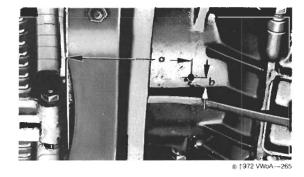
Lubrication access. Drill 10-mm (0.4-in.) hole in transmission case as shown. Dimension is 67 mm (2.6 in.); b is 10 mm (0.4 in.).
